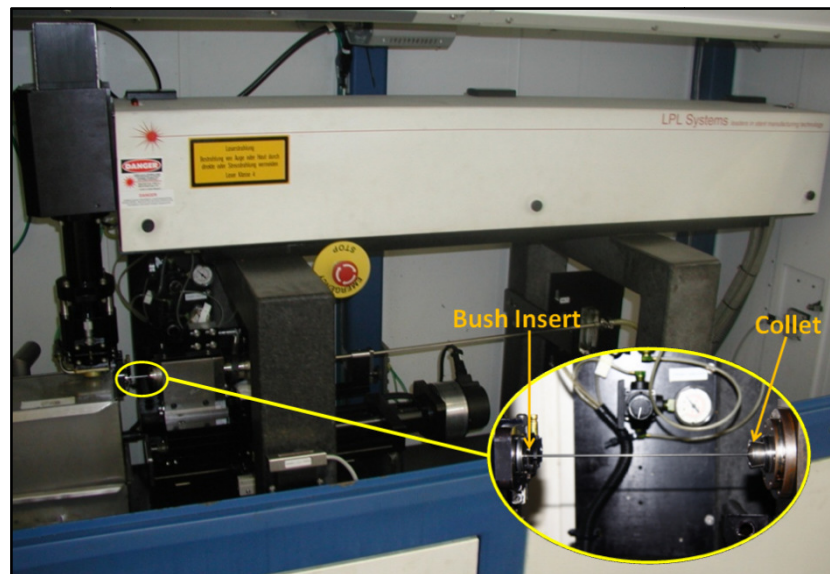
ASSEMBLED TUBE IN LASER CUTTING MACHINE
